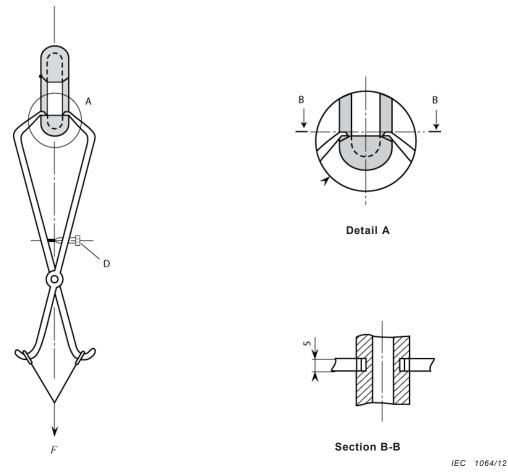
Principle of the testing device for checking adhesion of the insulating coating on conductive parts of the insulated hand tools –
